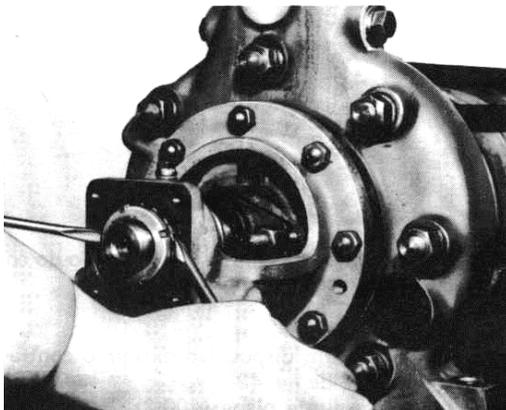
Forcing out the inner components of the cylindrical roller bearing
